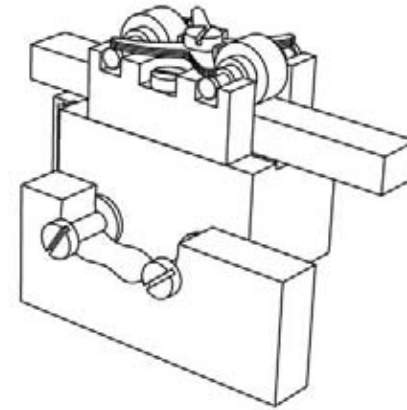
Example of mounting against one of the sides of the motor housing. The shims between the motor housing and the support make the installation relatively insensitive to uneven surfaces.
